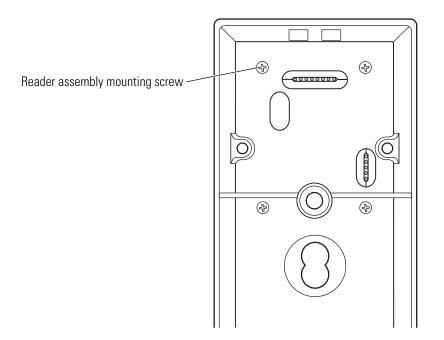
Removing the B.A.S.I.S. V proximity reader assembly from the outside escutcheon
